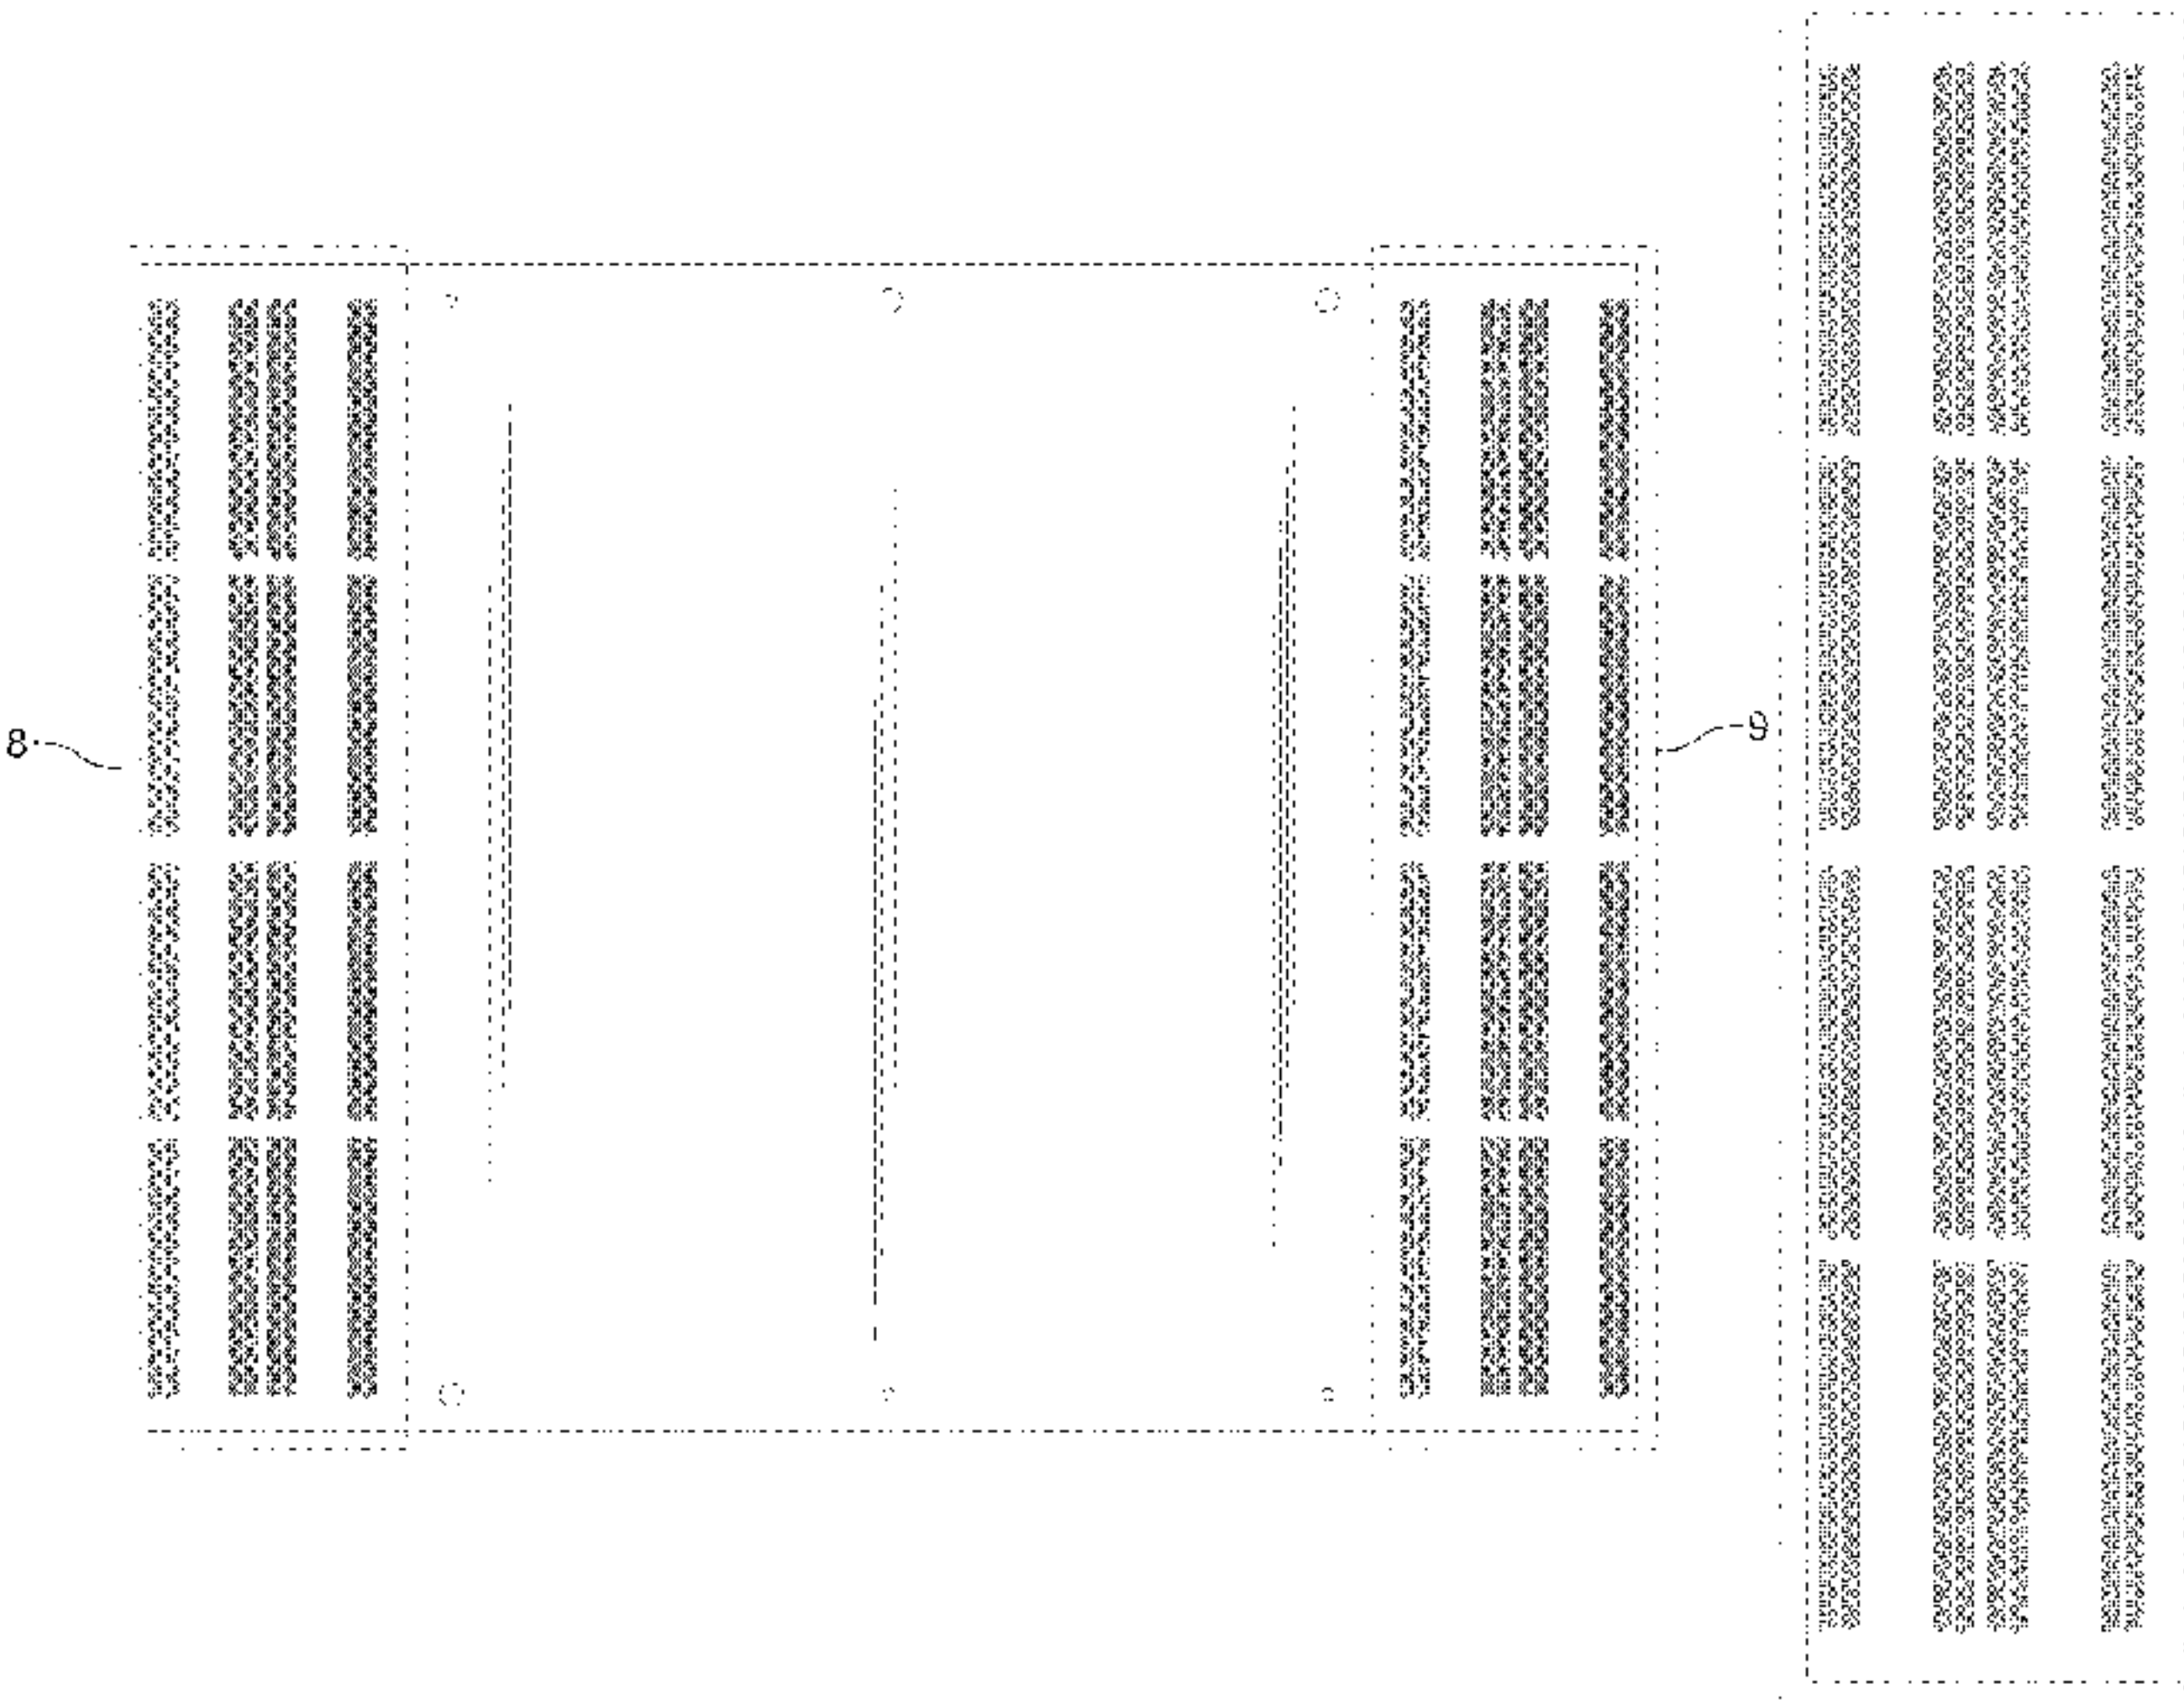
is a rear elevation view of a contact field for a printed circuit board;
